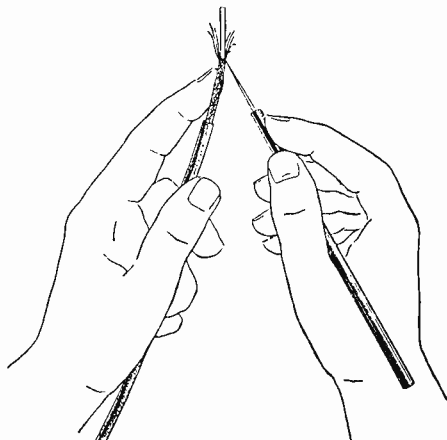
How to unravel a shield braid with a sharp-pointed tool.
